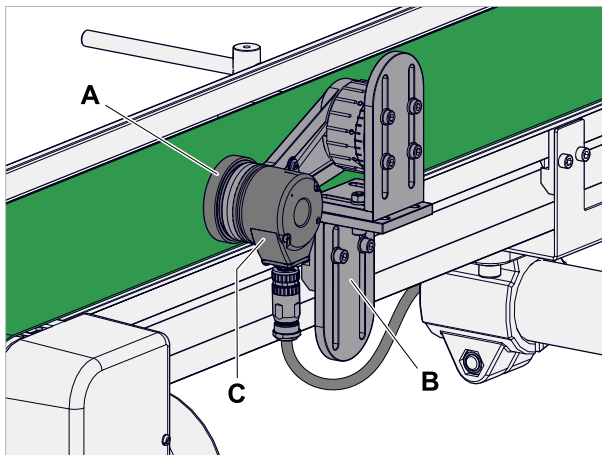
Rotary encoder kit N103709: A: Measuring wheel, B: Bracket, C: Rotary encoder
